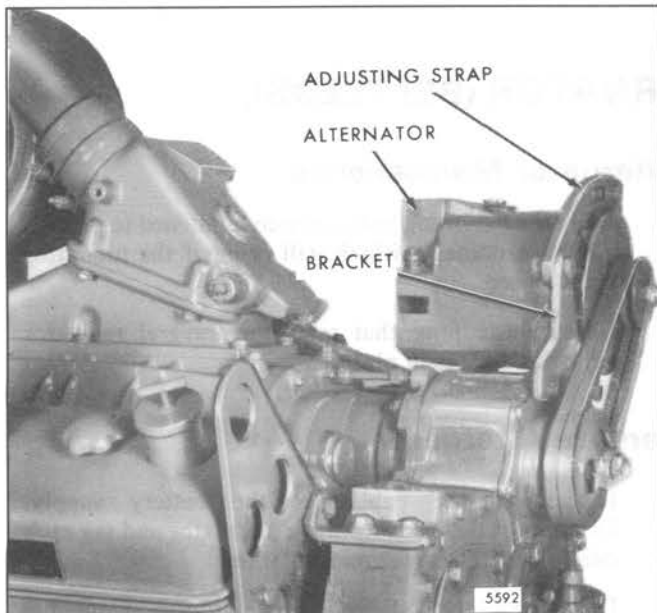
Typical Hinge-Mounted Alternator (Belt-Driven)
